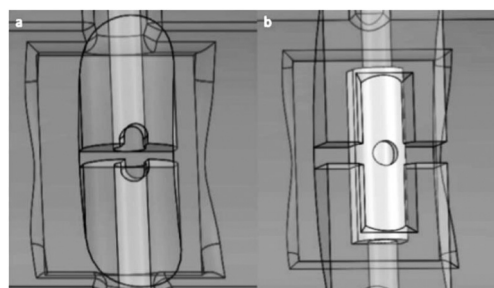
CAD image of the (a) slotted cutting chamber and (b) elastomeric buffer cutting chamber of the 3D printed biopsy segmentation proof-of-concept device.
